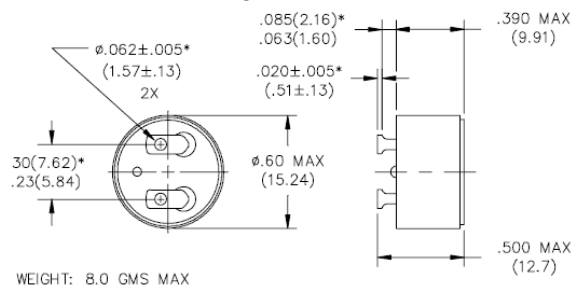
Honeywell 700 series layout (dimensions in inches)
